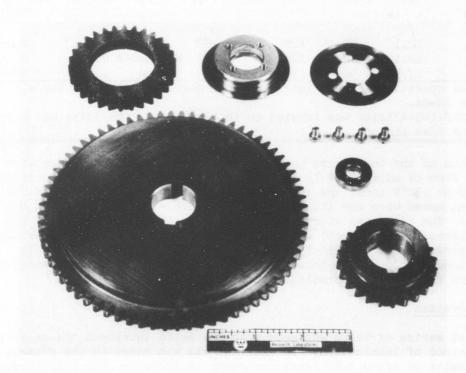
Steel Load Gears and WRP-140-A Idler Gear Components
